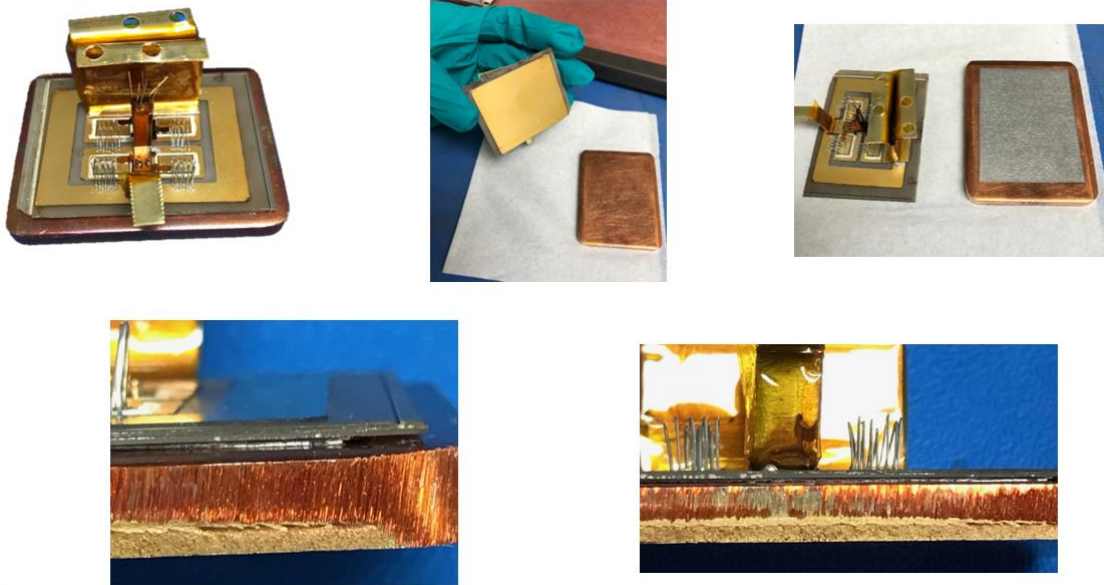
Processing for attaching the baseplate to the power module with cured layer displayed
